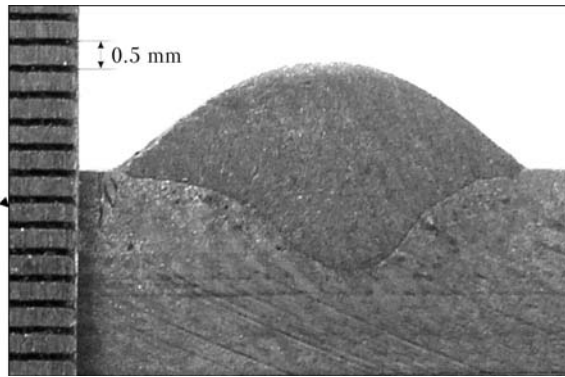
Weld macrosection ( $U_a = 19$  V;  $I_w = 160$  A;  $v_w = 0.75$  cm/s)
